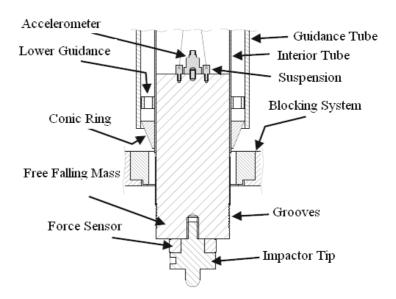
Detailed cutaway of the drop assembly, the guidance tube and the blocking system
